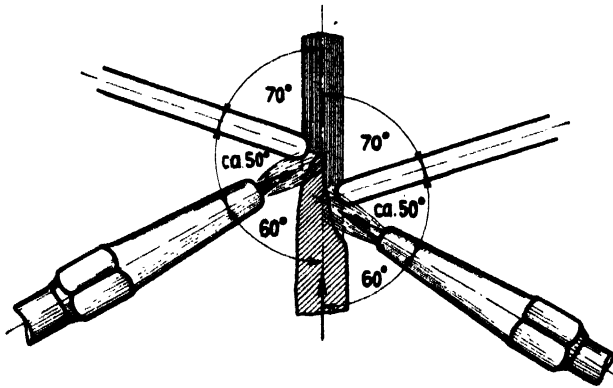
Application of blowpipes in welding from both sides.
